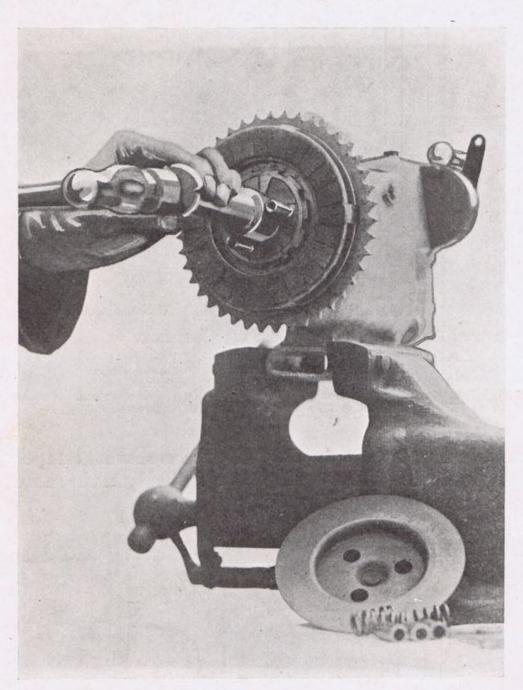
Driving Clutch Centre on to Mainshaft.
